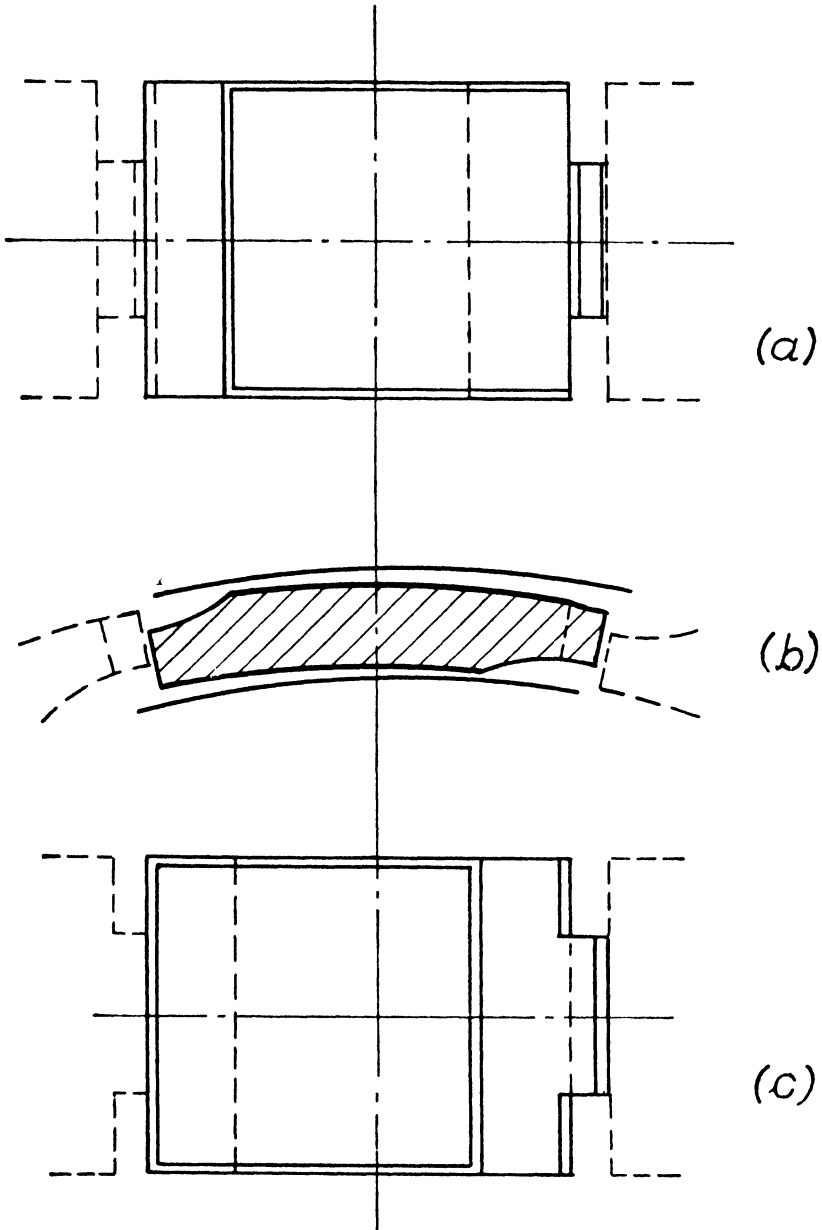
Details of floating pads of bearing shown in fig. VI, 26
